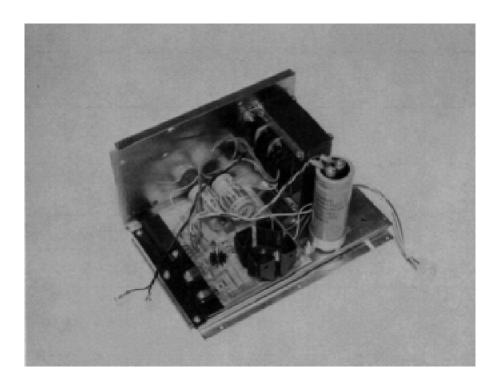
Sol-10 power supply subchassis assembly. (Rear of subchassis at left.)
